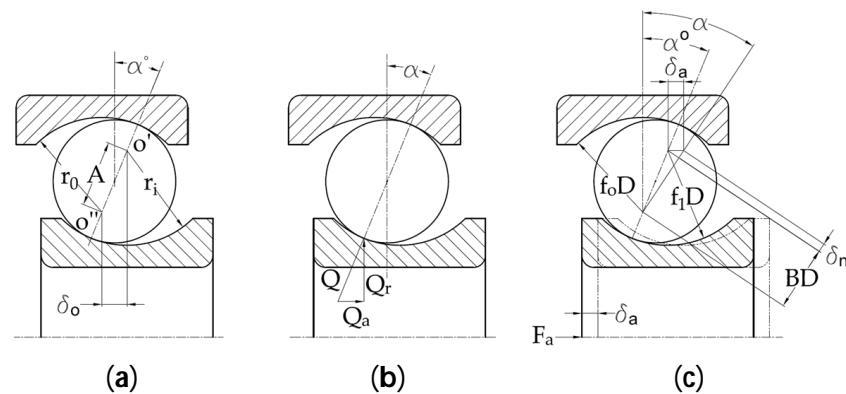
Adjustment of spacer length for preloading the bearings: (a) contact interface geometry, initial condition when touching but $Q = 0$; (b) contact normal force, axial and radial; (c) geometry change example at contact interface due to external loading or displacement.
